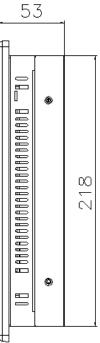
MPE 10 Physical Dimensions (millimeters)
